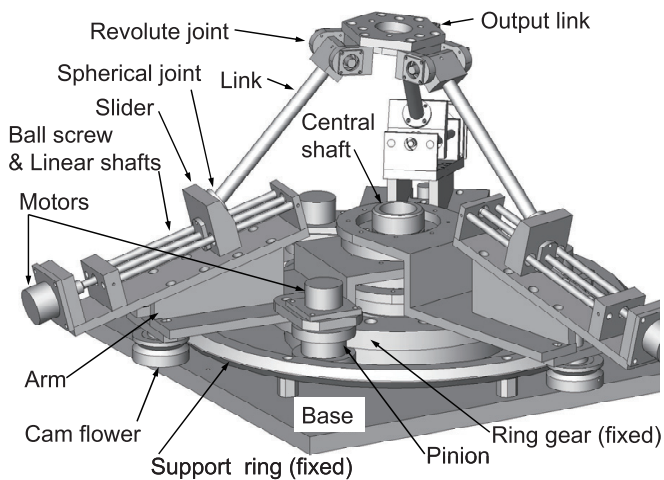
3D-drawing of the prototype 3-RPSR mechanism designed for a pipe bender.
